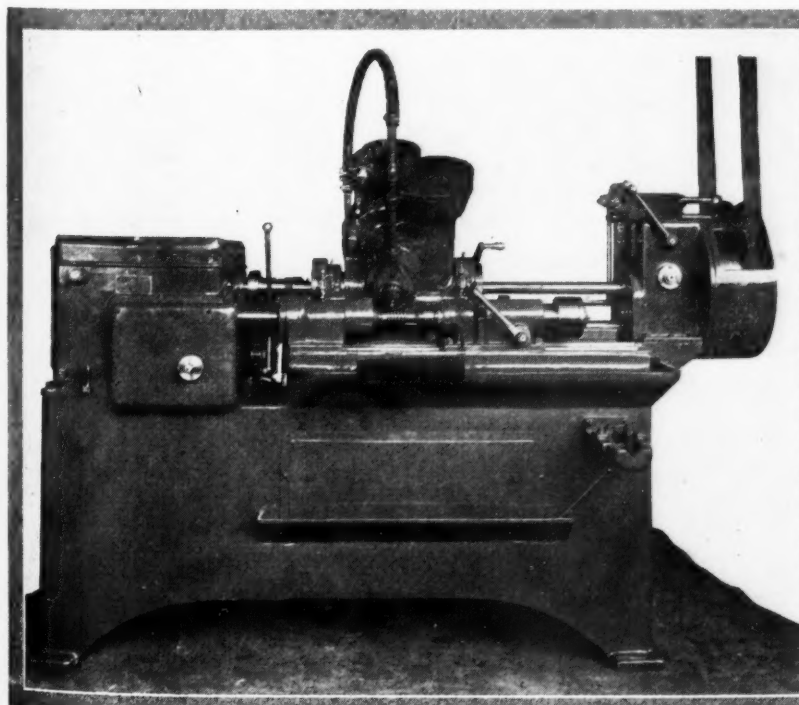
Front view of new model Thread Generator with quick-return mechanism
